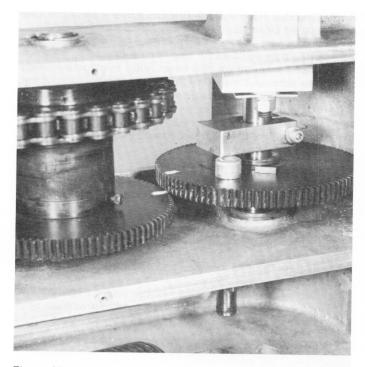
Unmeshing Mainshaft Gear and Cocking Clutch Gear
